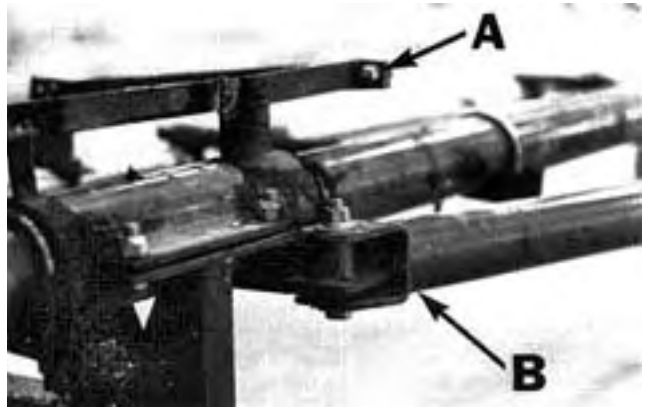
Interference Between Outer Radius Rod and Outer Tandem Beam Assembly.
